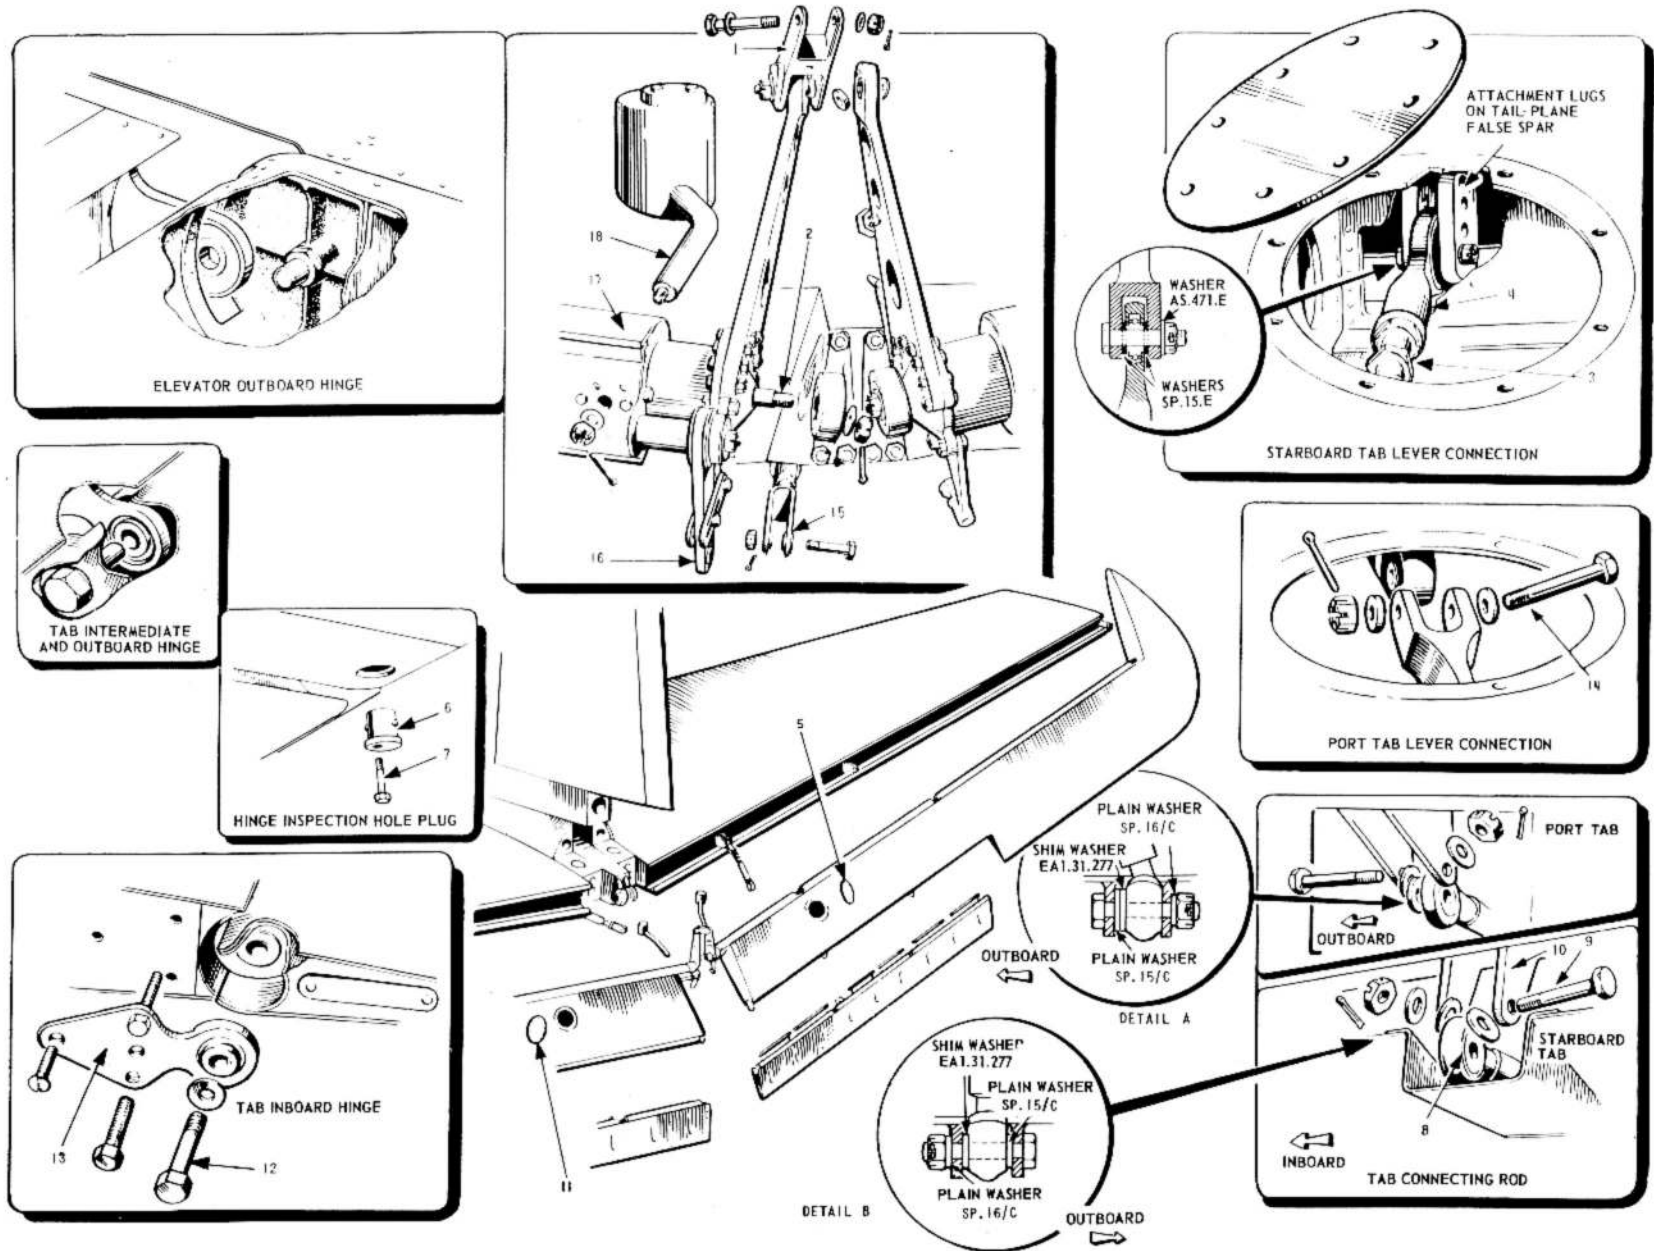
ELEVATOR AND ELEVATOR TAB REMOVAL
